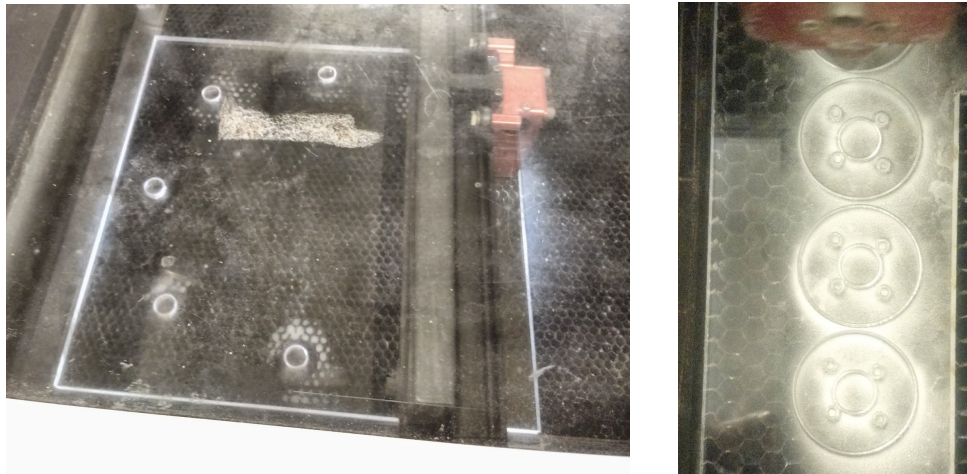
Fabrication of endcaps and motor mounts using the laser cutter.
